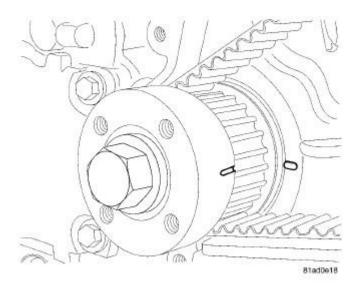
Crankshaft Timing Marks Courtesy of CHRYSLER LLC
